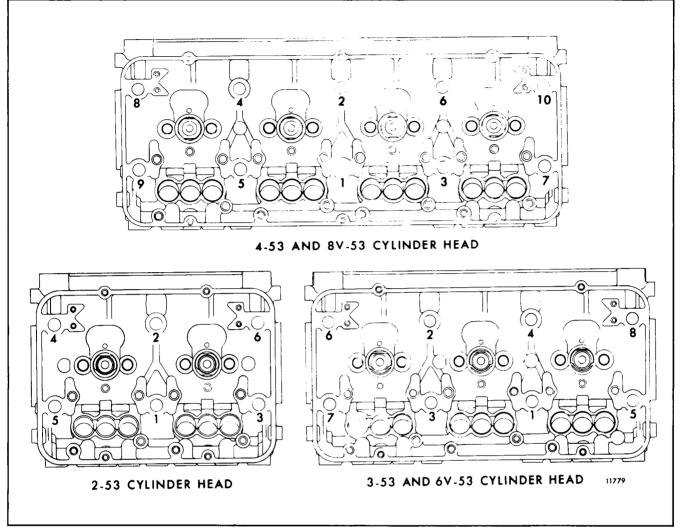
Cylinder Head Bolt Tightening Sequence
